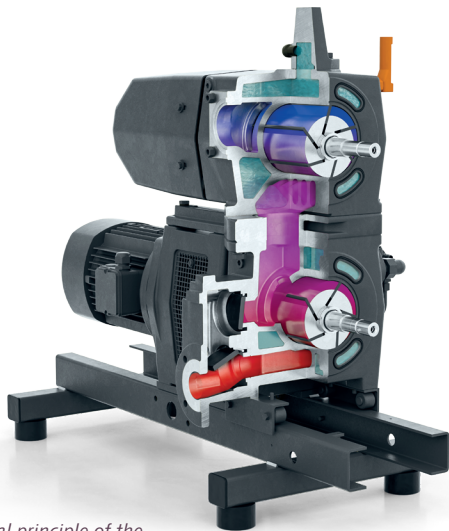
Operational principle of the Huckepack once-through oil-lubricated rotary vane vacuum pump
